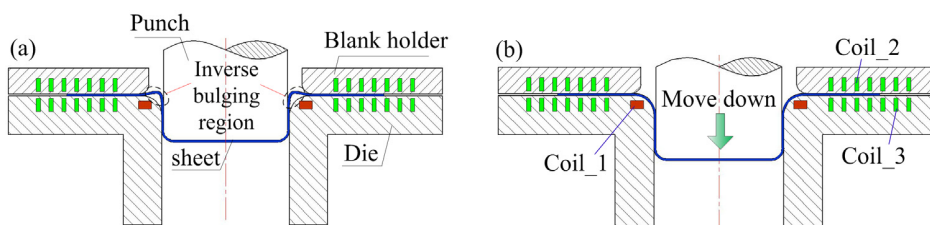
Forming process of incremental electromagnetic assisted stamping with radial pressure: (a) sheet inverse bulging; (b) sheet straightened by punch.
